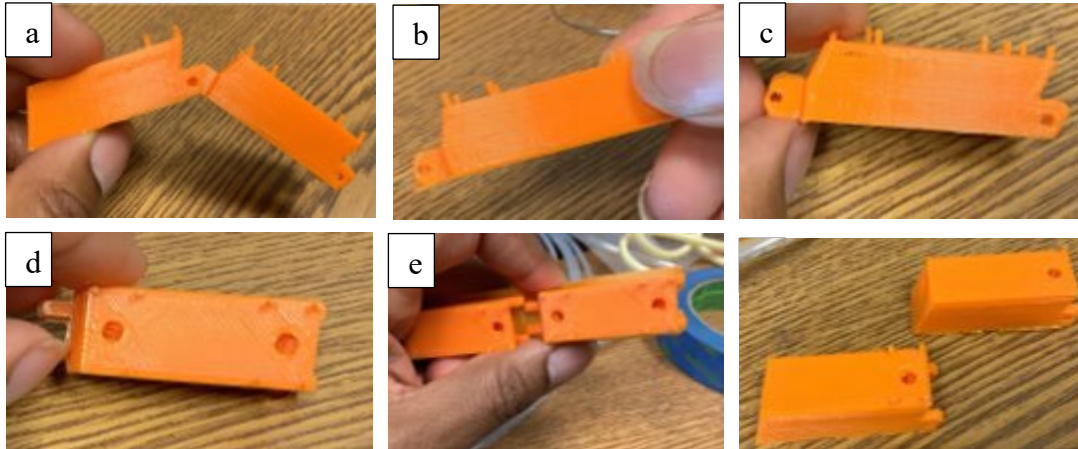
Actuator design concept 1, printing errors (a)Axis of rotation not aligning (b) Pin joint potential failure mode (c) Hollowed wall scorching defect (d) Loose material inside (e) Tolerancing for interlocking components (f) Broken clamps on top right piece.
